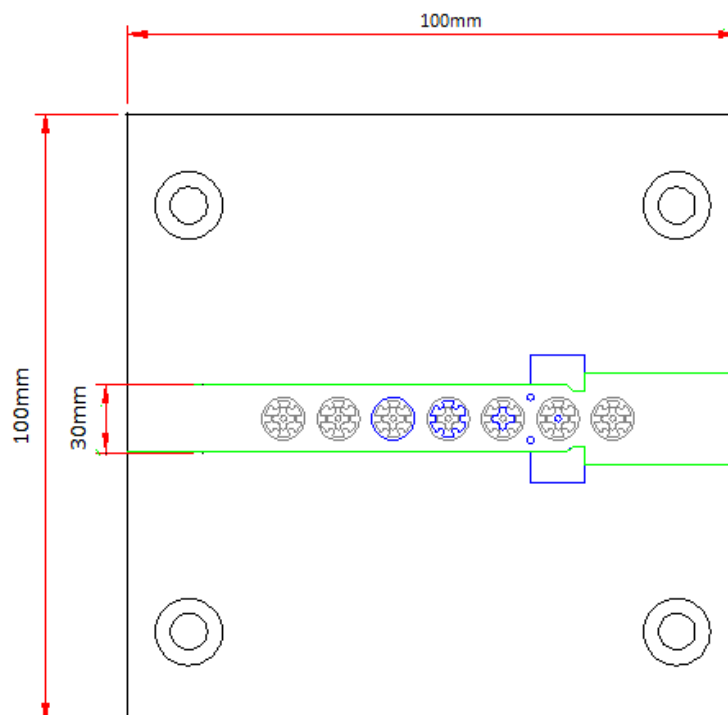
Schematic design of tool used for the cutting of the rotor and stator.
